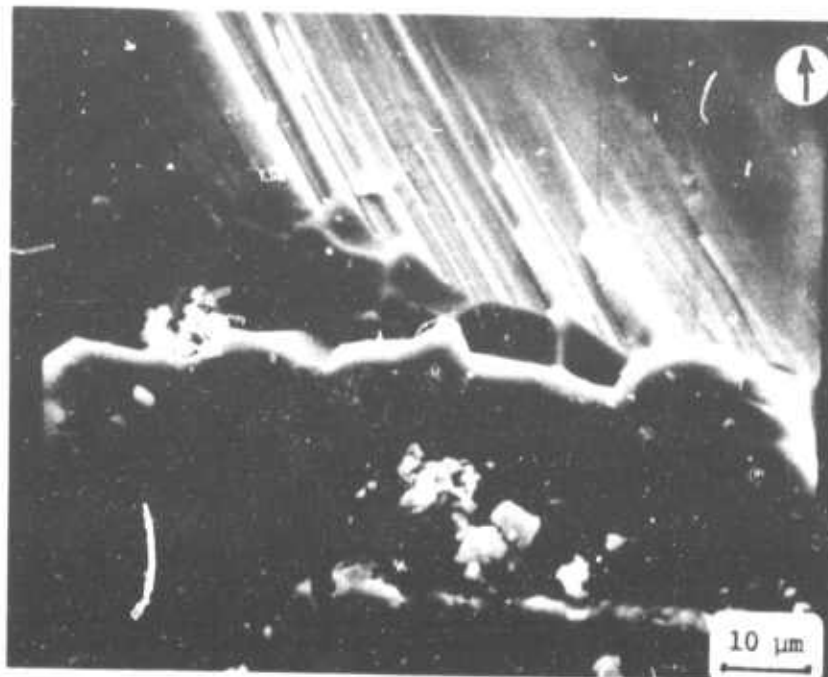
Enlarged View Showing Intergranular Fatigue Fracture Initiation
